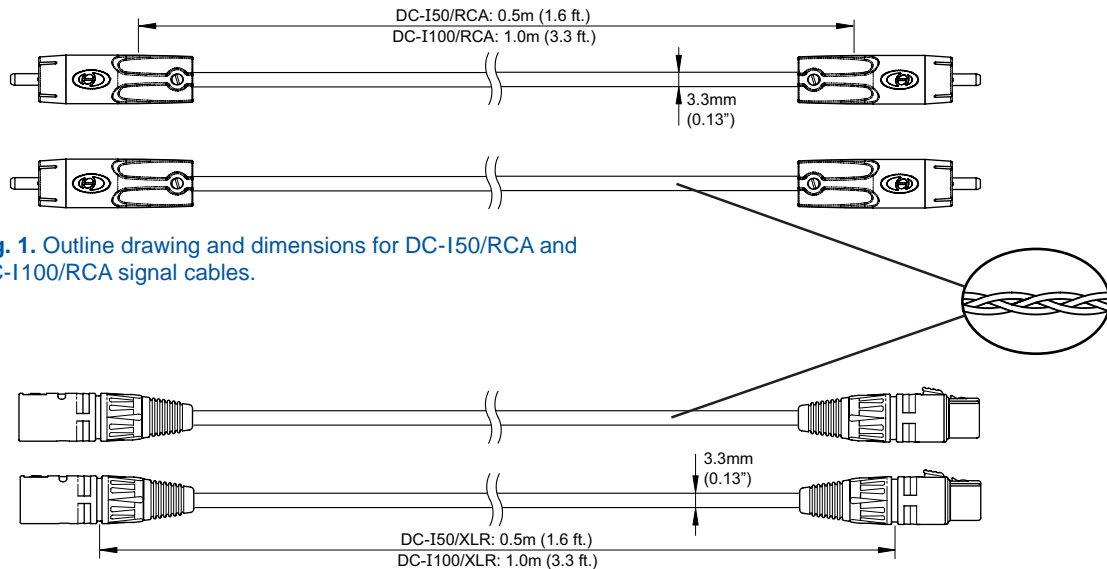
Outline drawing and dimensions for DC-I50/RCA and DC-I100/RCA signal cables.
